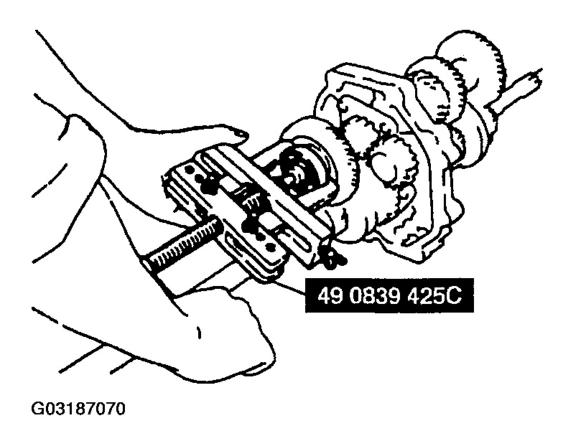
Removing Countershaft Rear Bearing Courtesy of MAZDA MOTORS CORP.
